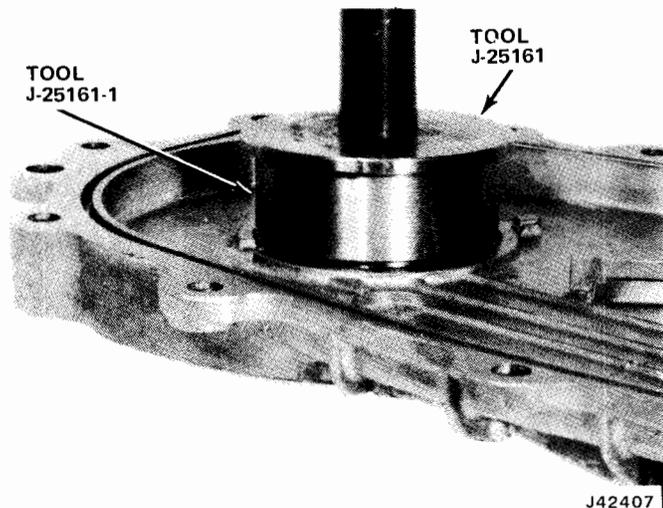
Removing Drive Sprocket Rear Needle Bearing
